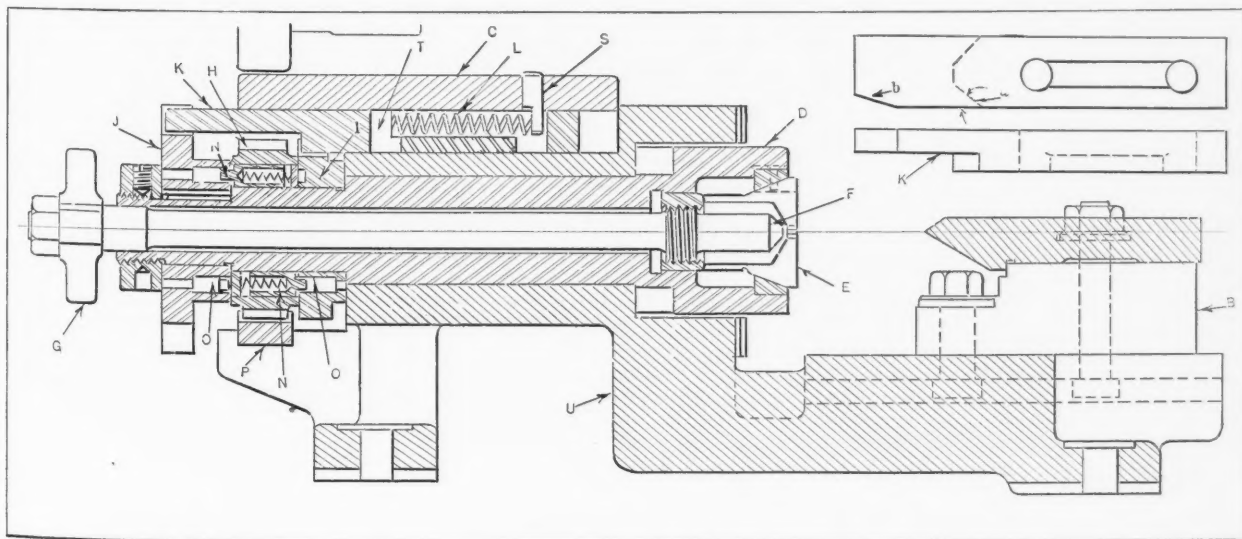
Cross-section of Indexing Tap-fluting Fixture Shown in Fig. 1
